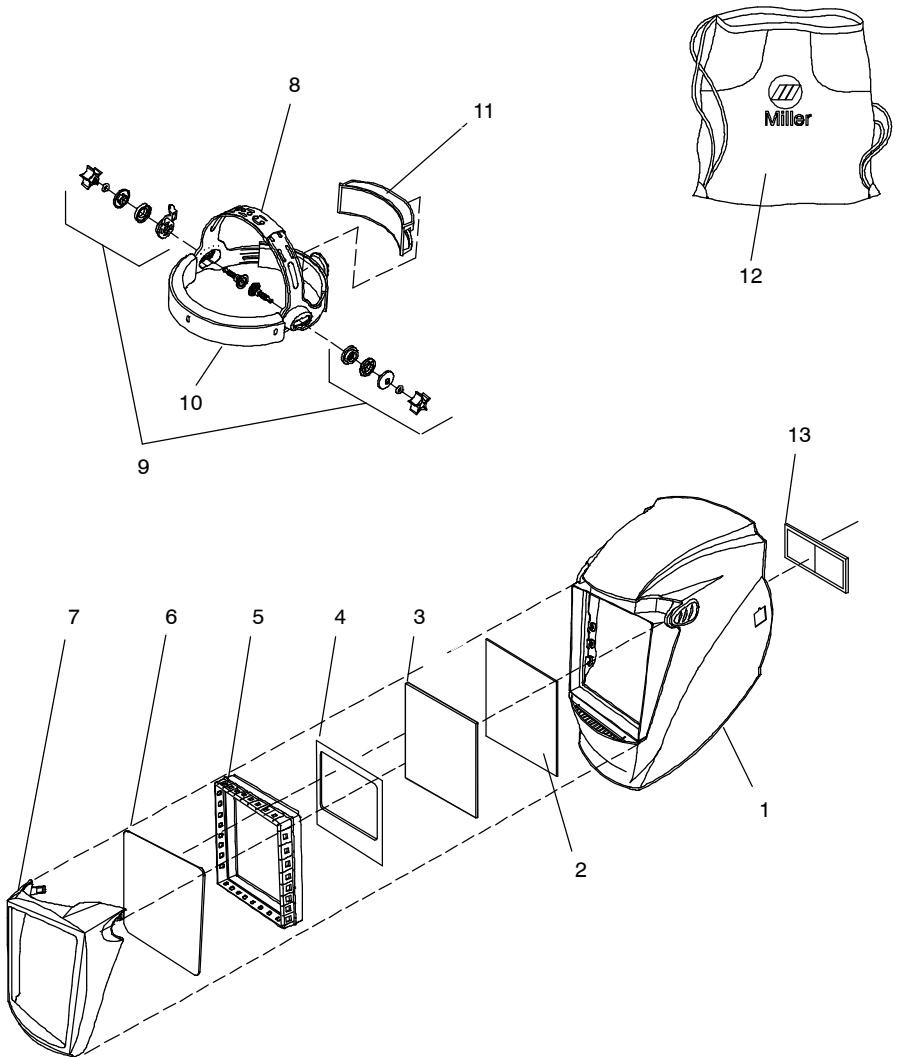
Titanium 1600 Welding Helmet
